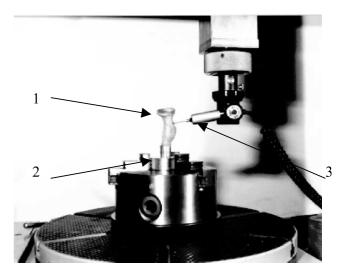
Radial head measuring using CMM; where 1– radial head specimen, 2 – holder, 3 – contact probe.
